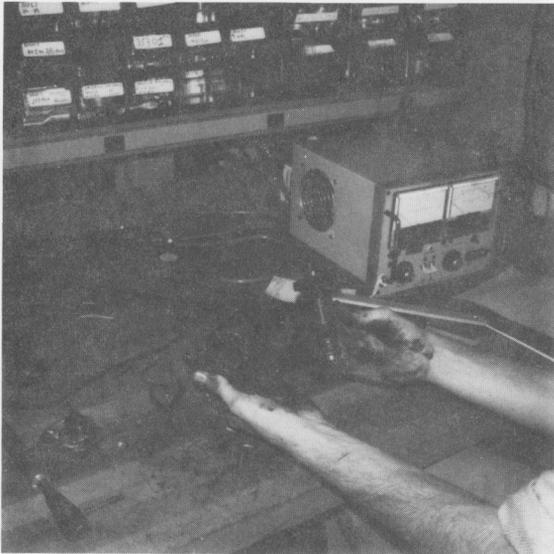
Disassembled, overloaded coal-conditioned drill, 3-15-76;
